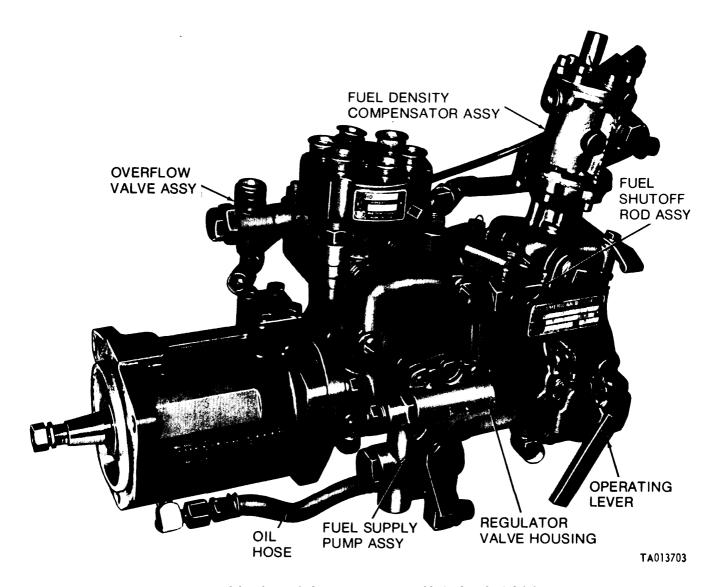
Metering and distributing fuel injection pump assembly (early code F), left front view.
